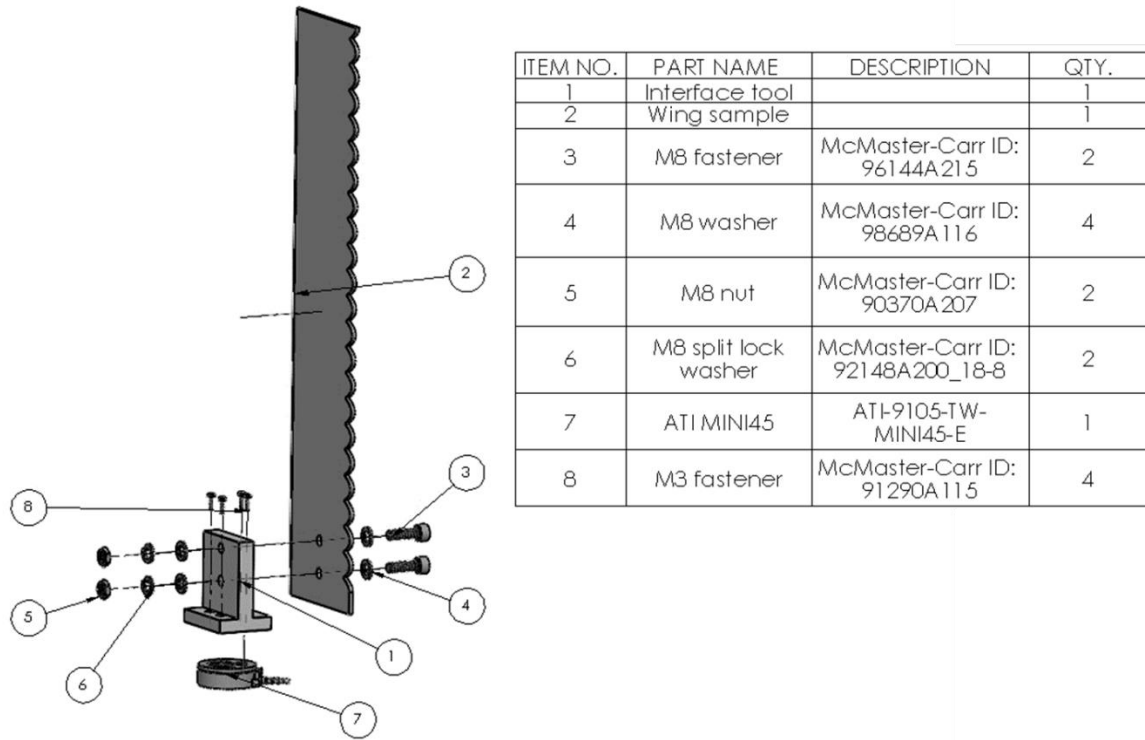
Assembly of 3' x 3' WT's wing setup (exploded view).
